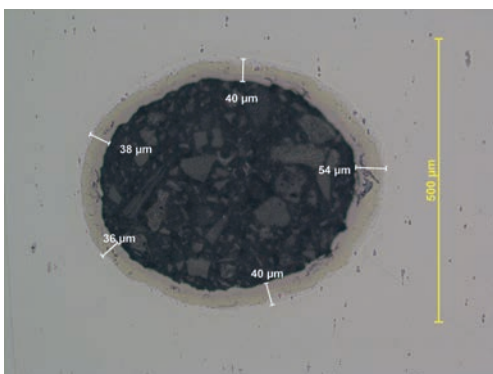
Section view of type "A" hole drilled with 0.3 mm electrode
